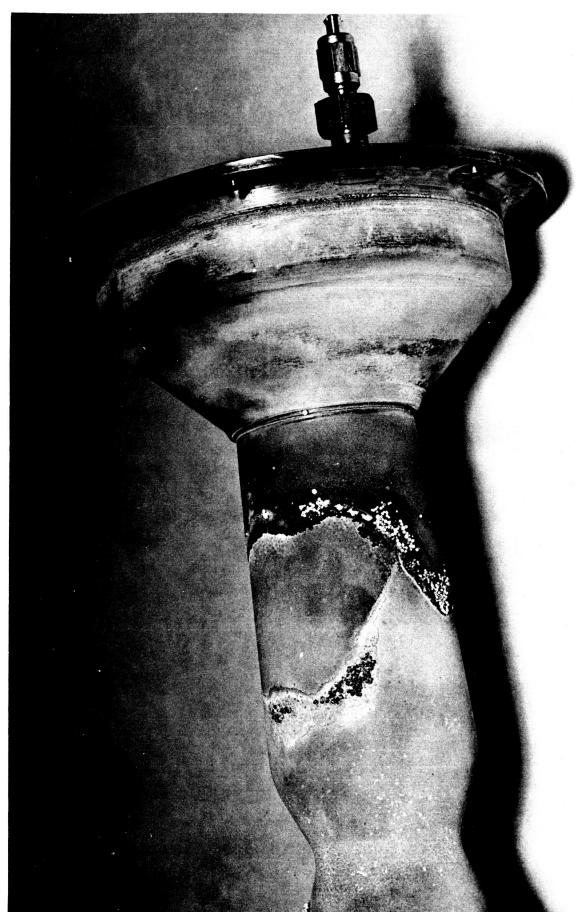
Chamber From Engine Assembly S/N 2 After Fire Test
